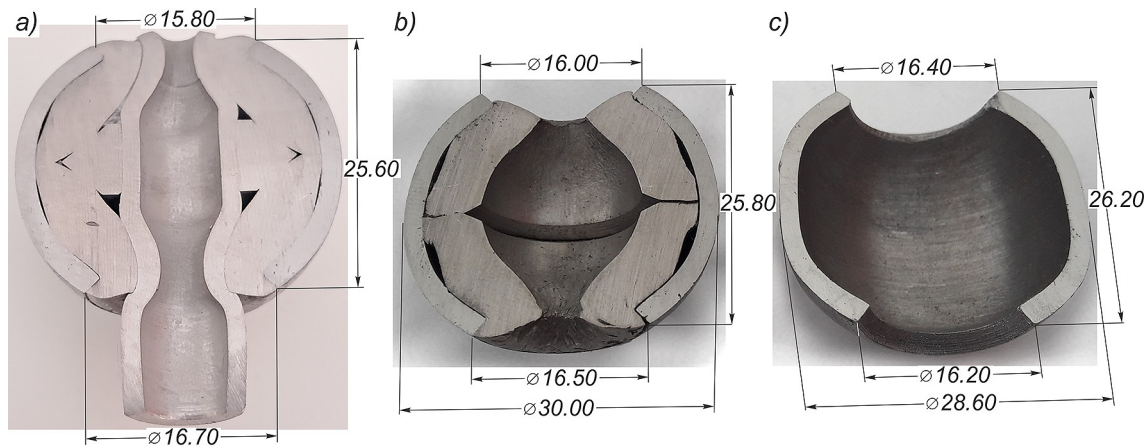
Example of making a steel ball according to variant A (a), using only expanding inserts (b) and without using any deformable inserts (c)
